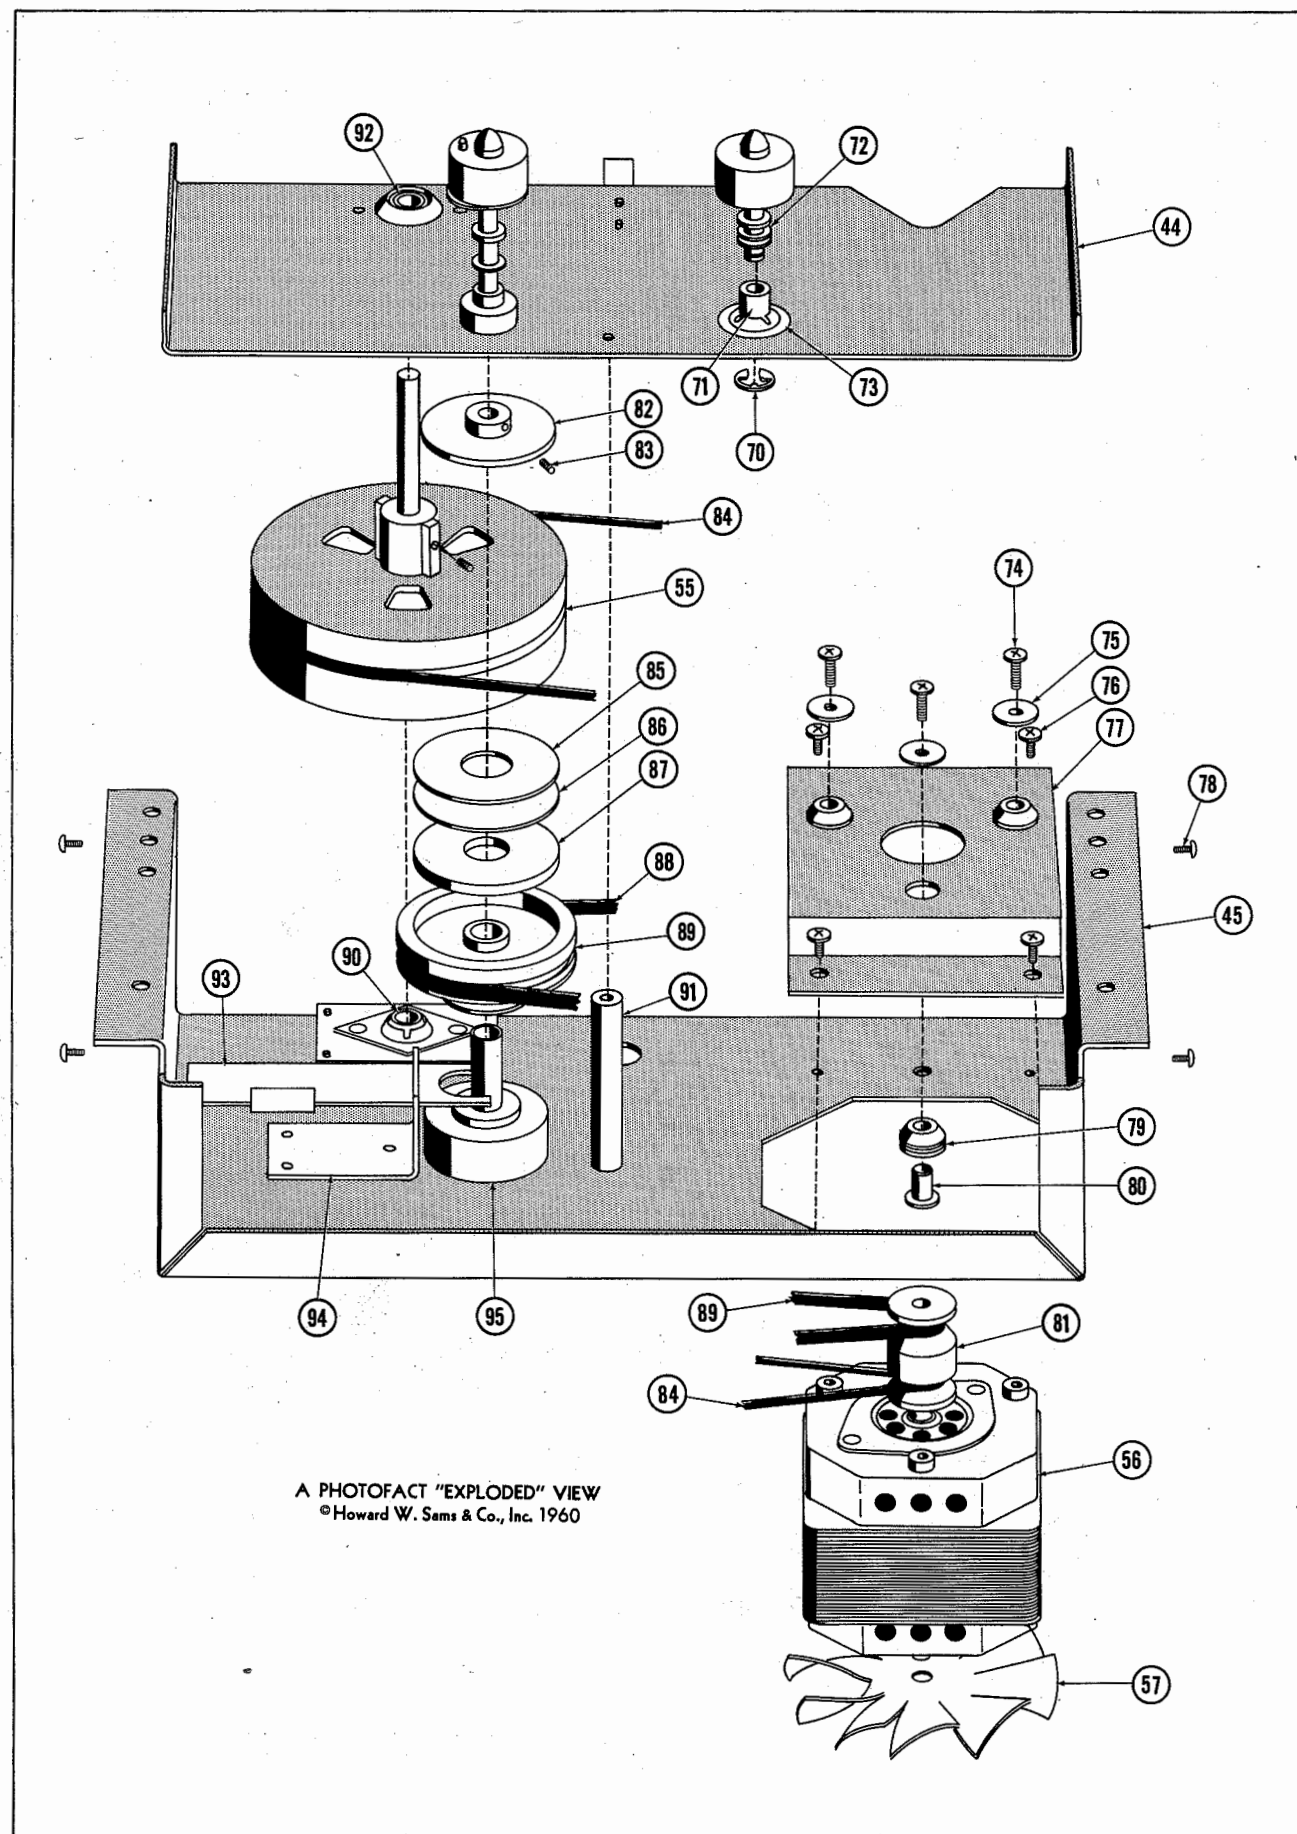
C EXPLODED VIEW OF PARTS BELOW SUB DECK TOP PLATE
